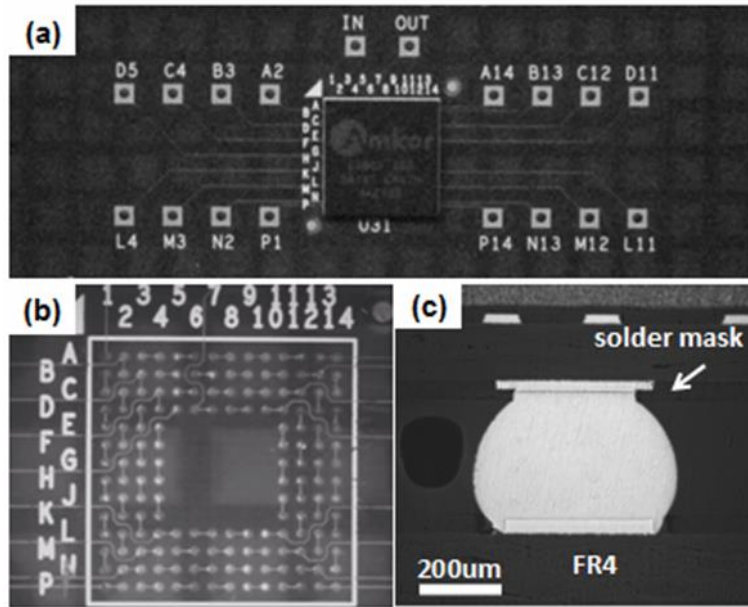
Picture showing (a) the PBGA assembly used for shear fatigue testing, (b) solder alloy configuration, and (c) cross-sectional view of the 600um solder ball.
